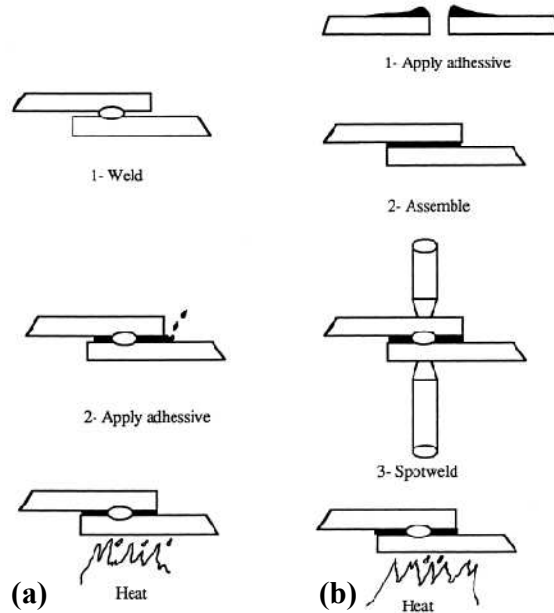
Illustrations of Weld bonding process [40]
